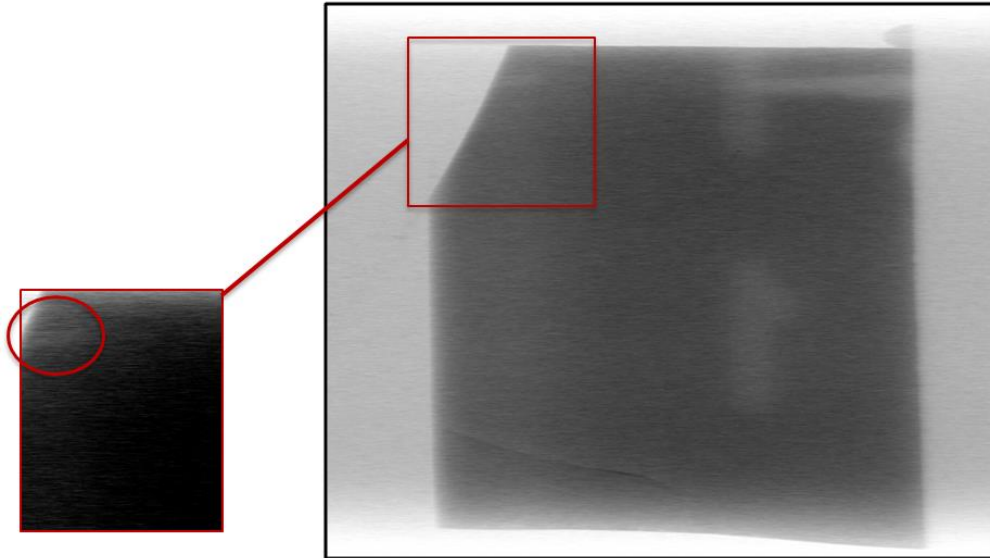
CR image of weld phantom exposed at 1 MeV. Inconsistency in weld (lighter region in blown up section) was able to be detected.
